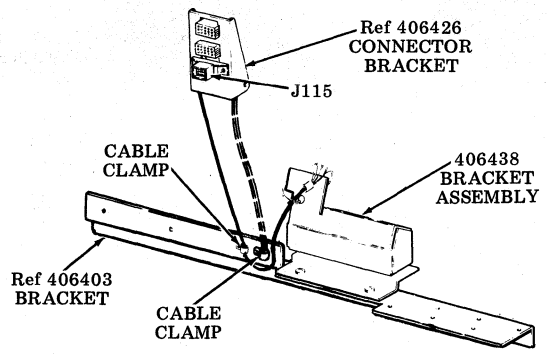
40CAB302 Forms Access Printer Cabinet Basic Wiring (Late Design)
